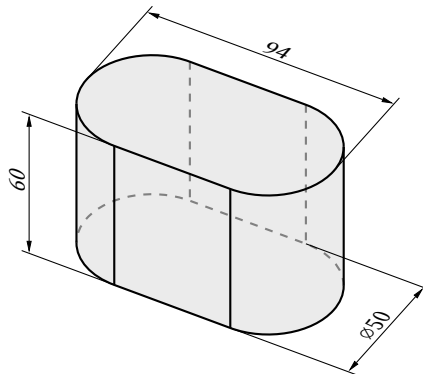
Available design space for one LAU with the dimensions given in millimeters
